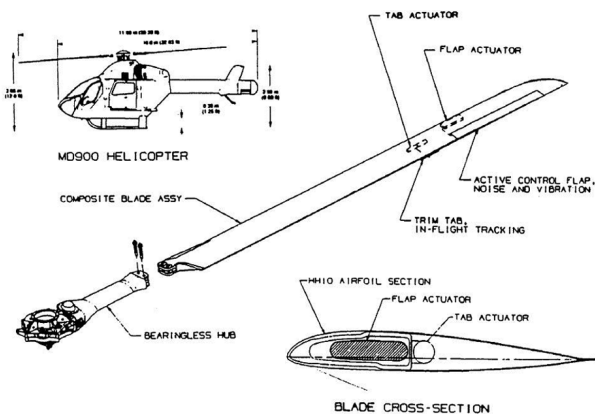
MD-900 rotor blade with control surfaces actuated by SMART and X-Frame
